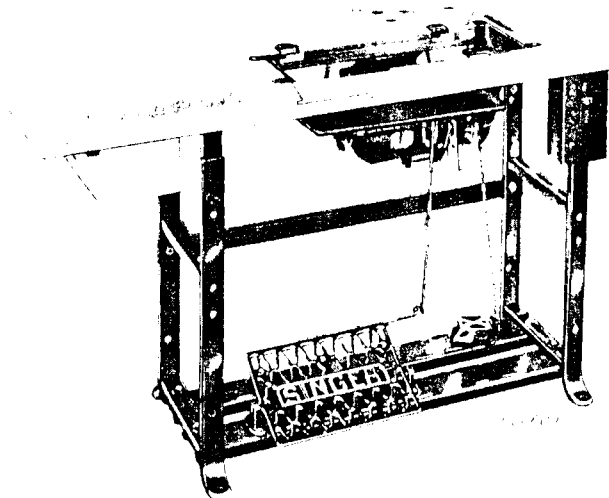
Stand, Table and Electric Transmitter Assembled for Operation of Class 300w Machine
